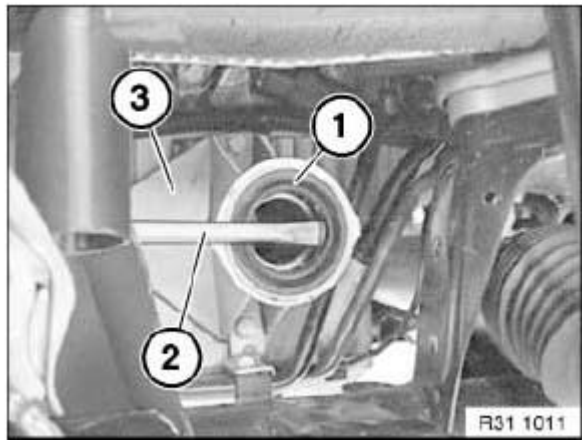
Identifying Shaft Seal, Screwdriver And Bearing Block
